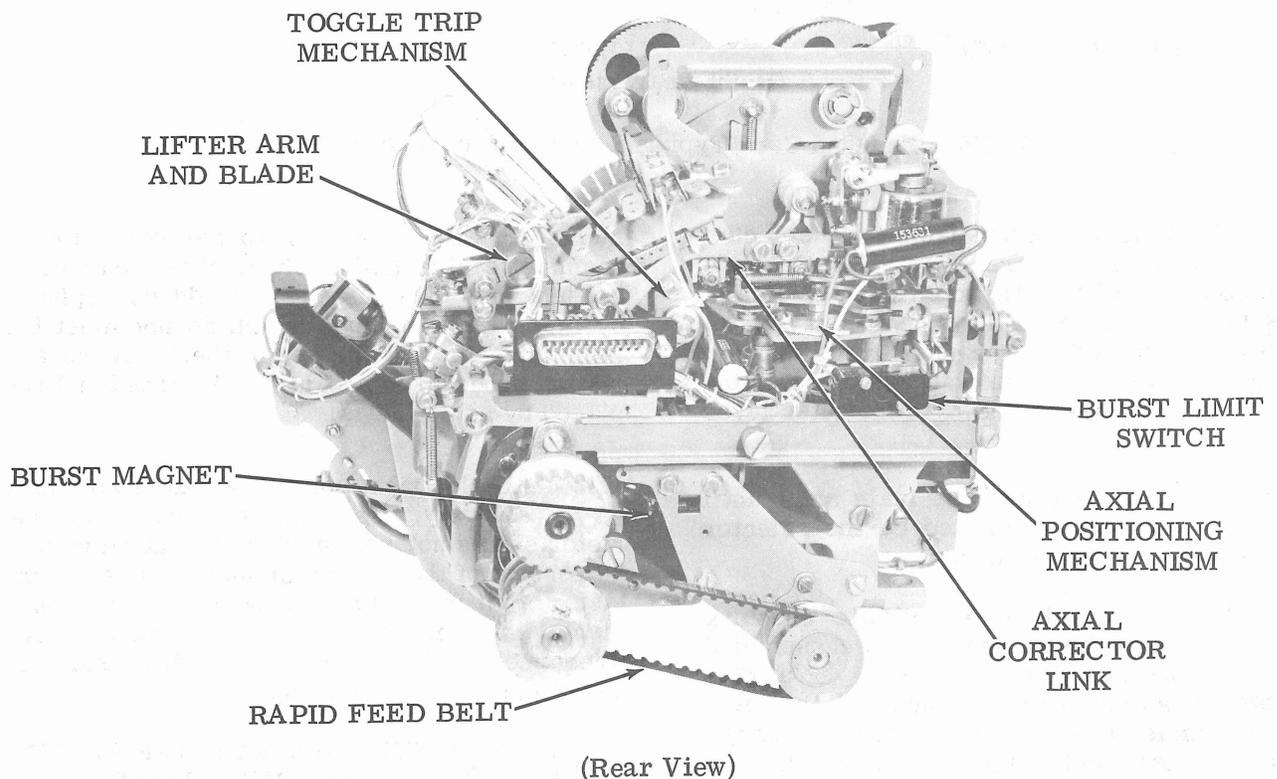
35 Edge Punched Card Typing Reperforator (Without Top Plates)
